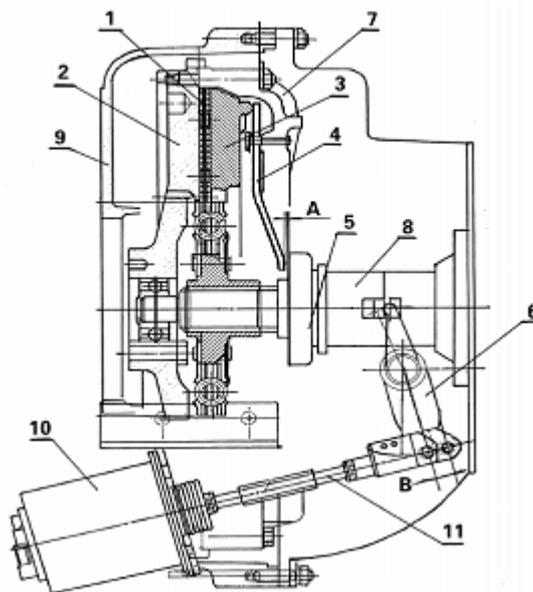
Push-type Clutch Pressure Plate Assembly
